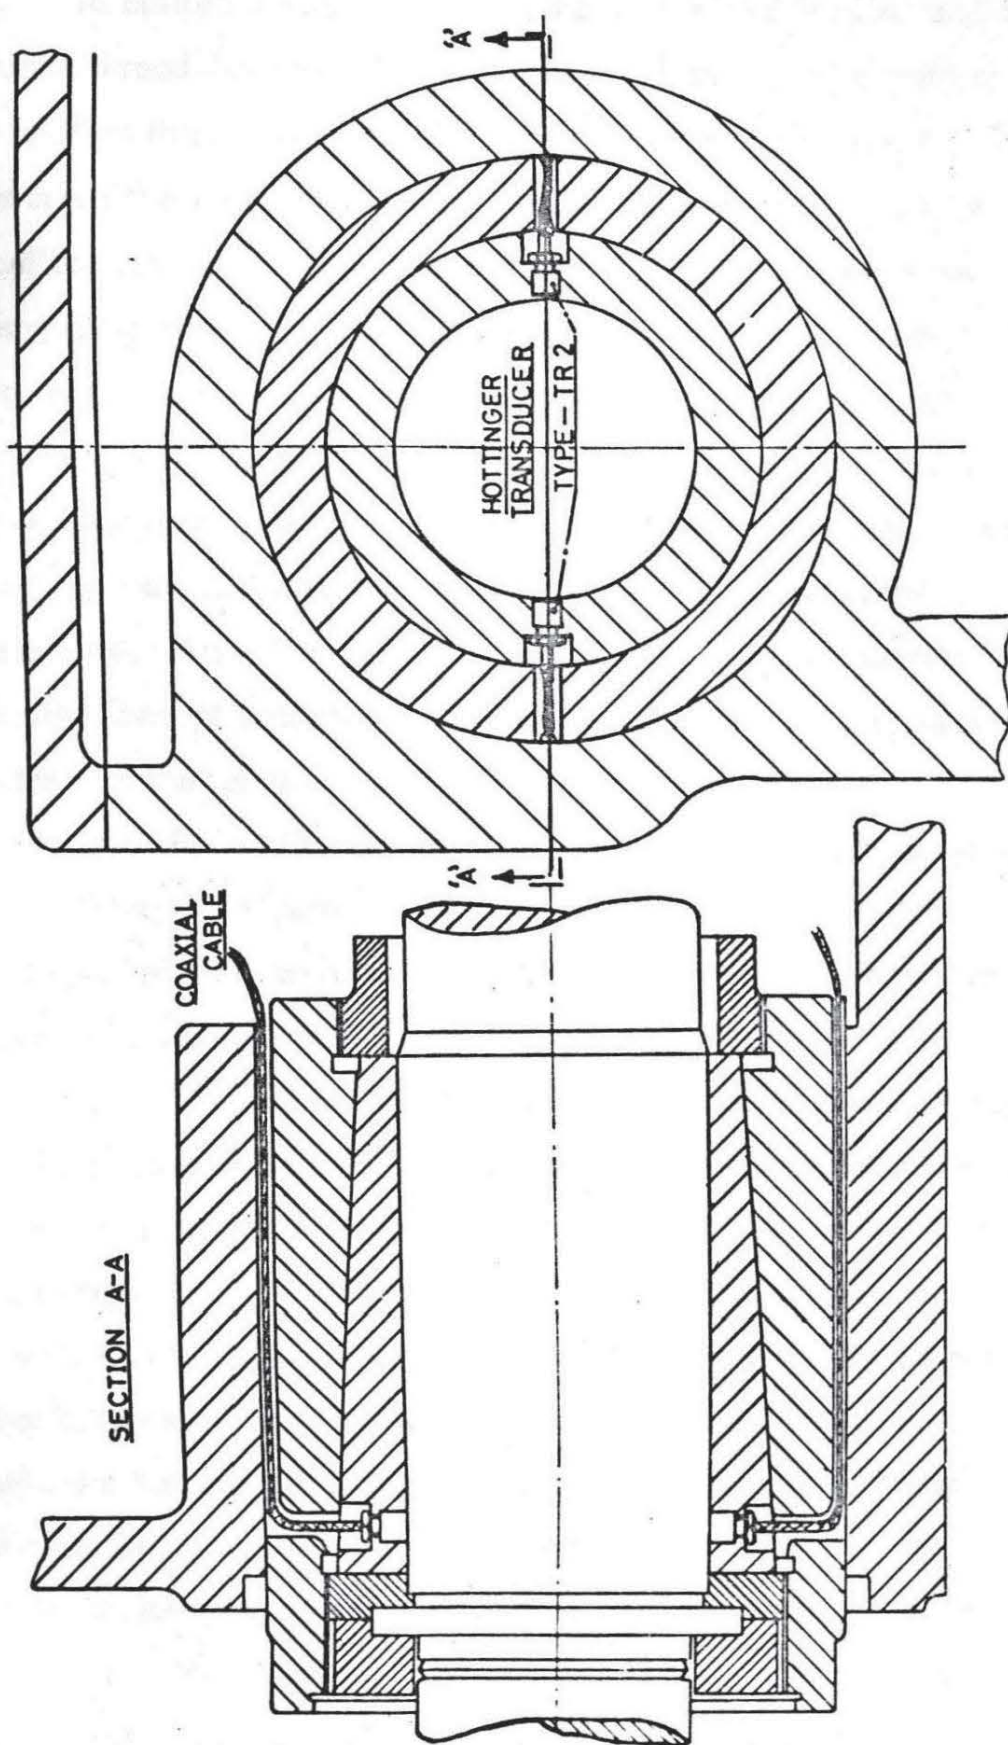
LOCATION OF PROXIMITY INDUCTIVE DISPLACEMENT TRANSDUCERS IN THE SPINDLE BEARINGS.
